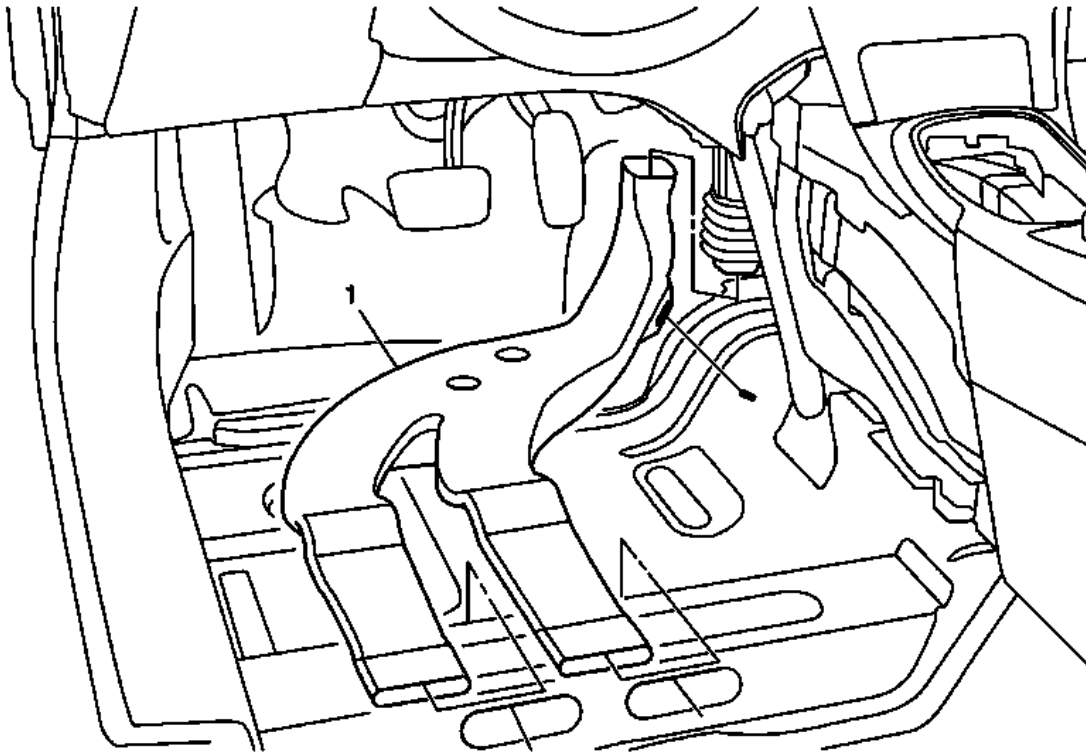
Floor Rear Air Outlet Duct - Left Side
